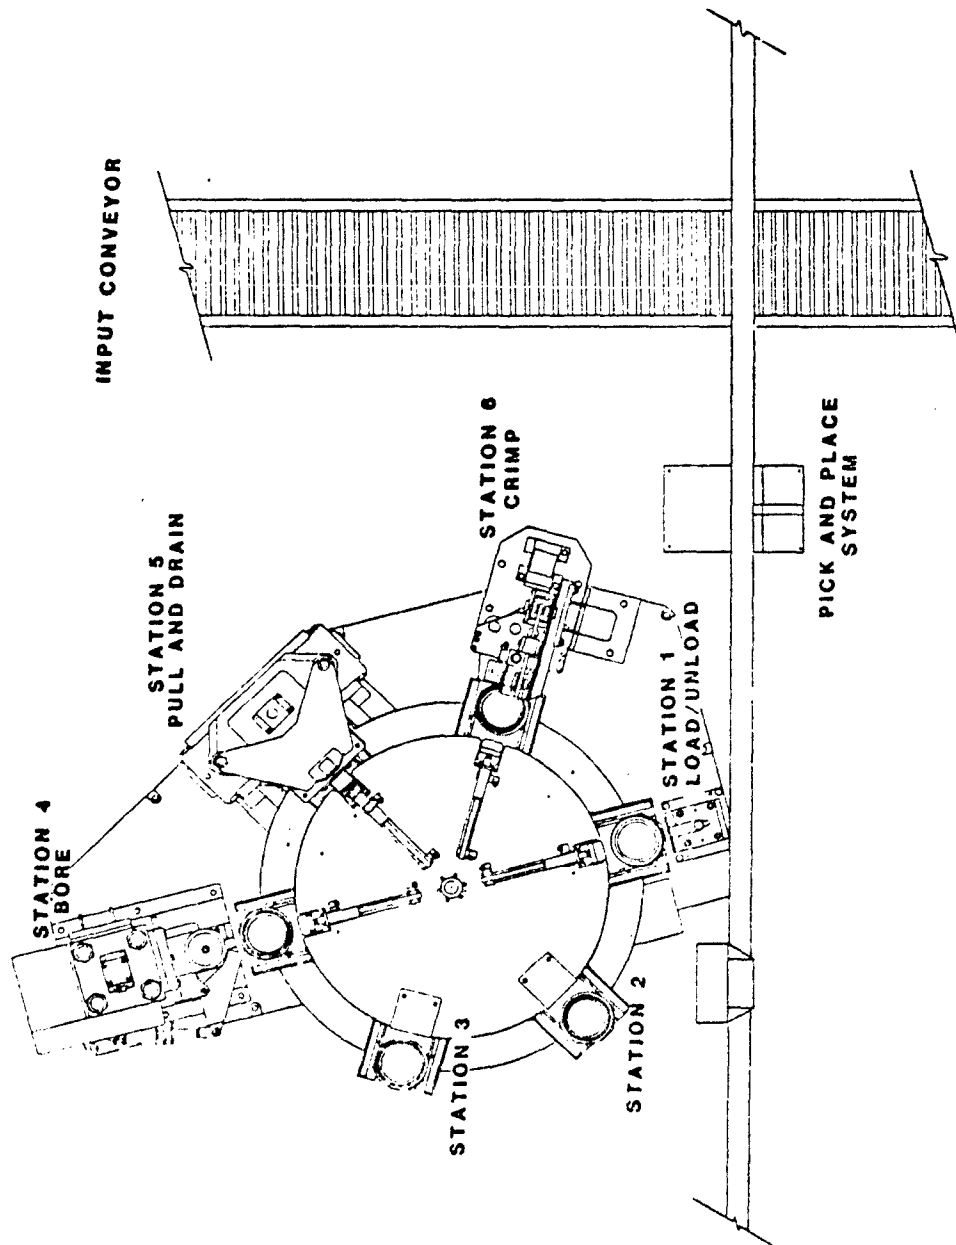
MULTI-PURPOSE DEMIL MACHINE.
